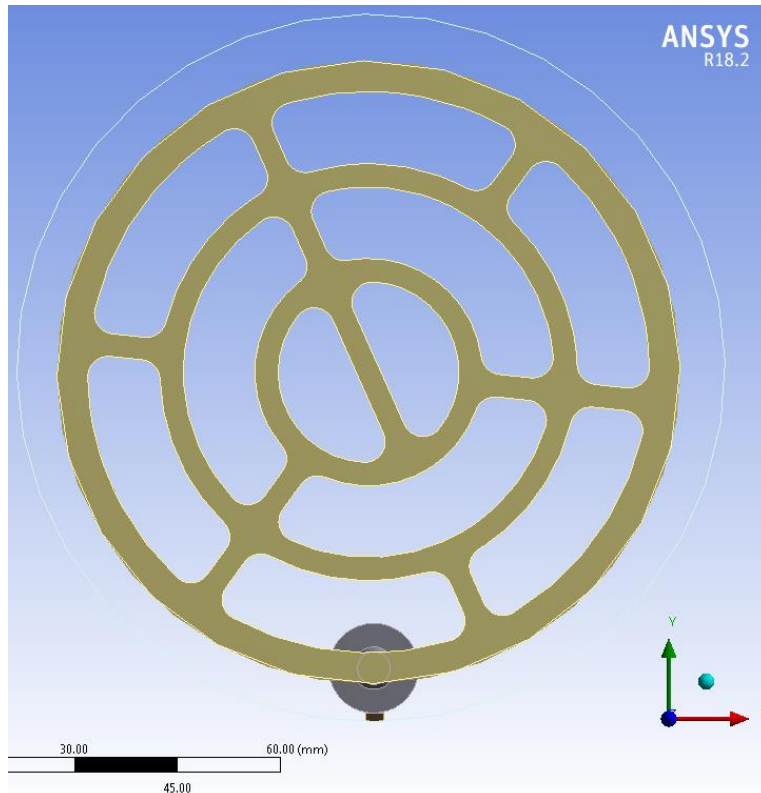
Axial view of 1 rod model configuration inside pressure tube.
